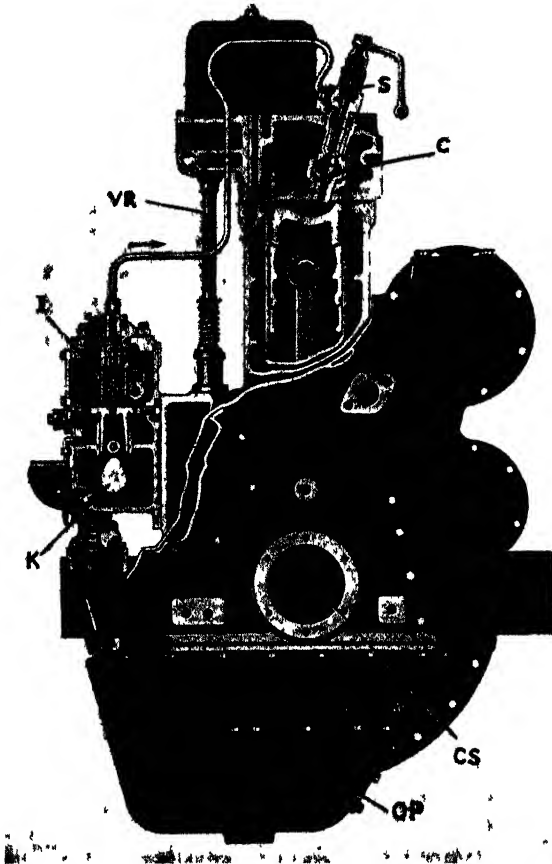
C*.—Caterpillar precombustion-chamber Diesel. *C* = precombustion chamber; *S* = fuel spray valve, *VR* = valve push rod, *I* = fuel pump; *K* = fuel-pump cam; *CS* = crankshaft, *OP* = oil pan.
